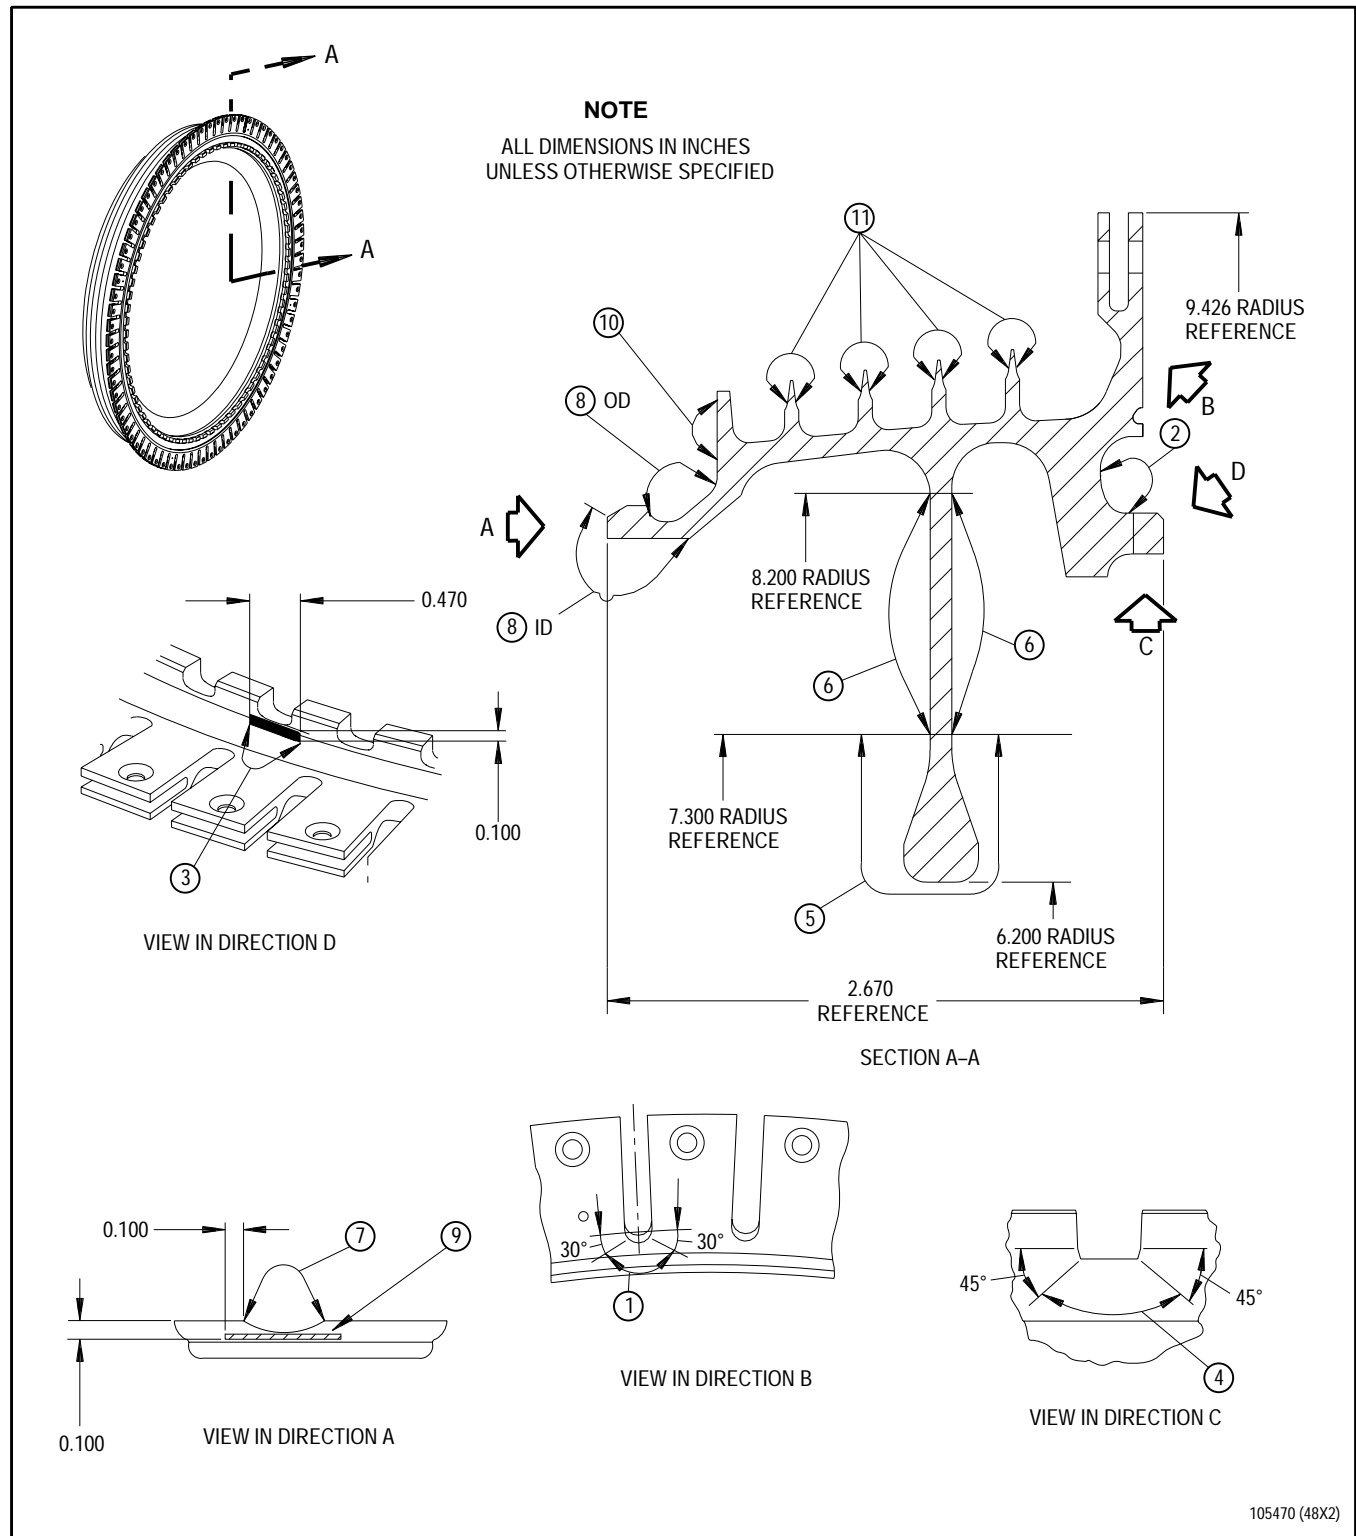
Second Stage Turbine Blade Retaining Plate - Eddy Current Inspection
